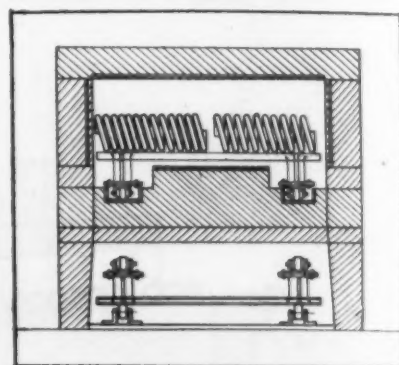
Section through a resistor type drawing furnace showing the arrangement of the springs in the furnace.
